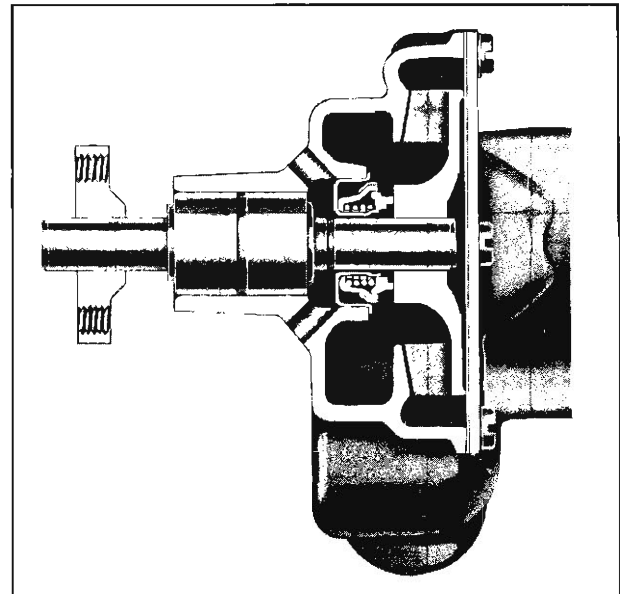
Water Pump, 283 Cu. In., 8 Cylinder
